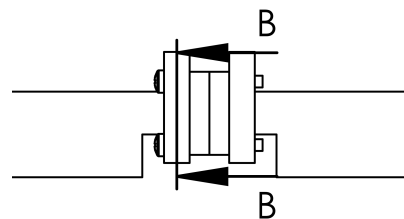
Lateral view diagram where two directional couplers are joined flange-to-flange using U-shaped washers and threaded bolts and nylon locking (nylock) nuts. The line B-B marks a cross section through one of the U-washers. See figure 7 for the directional couplers without washers.
